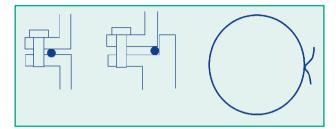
Indium seals; face seal, corner seal and loop showing ends of wire crossed
